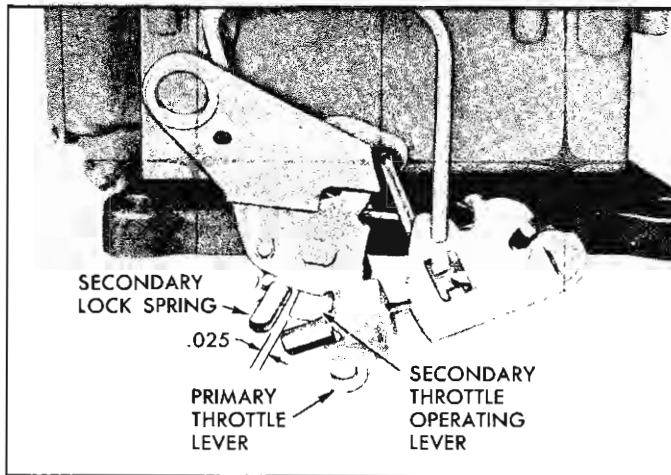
Secondary Throttle Valve Lock Spring Adjustment
